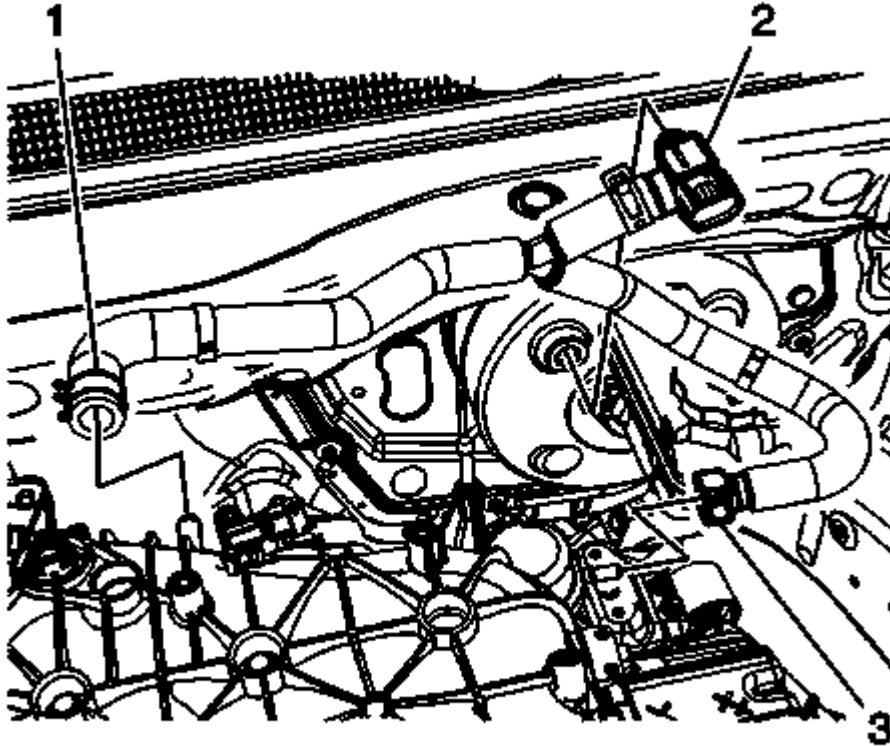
Power Brake Booster Vacuum Hose Quick Connect, Spring Clamp & Vacuum Sensor
